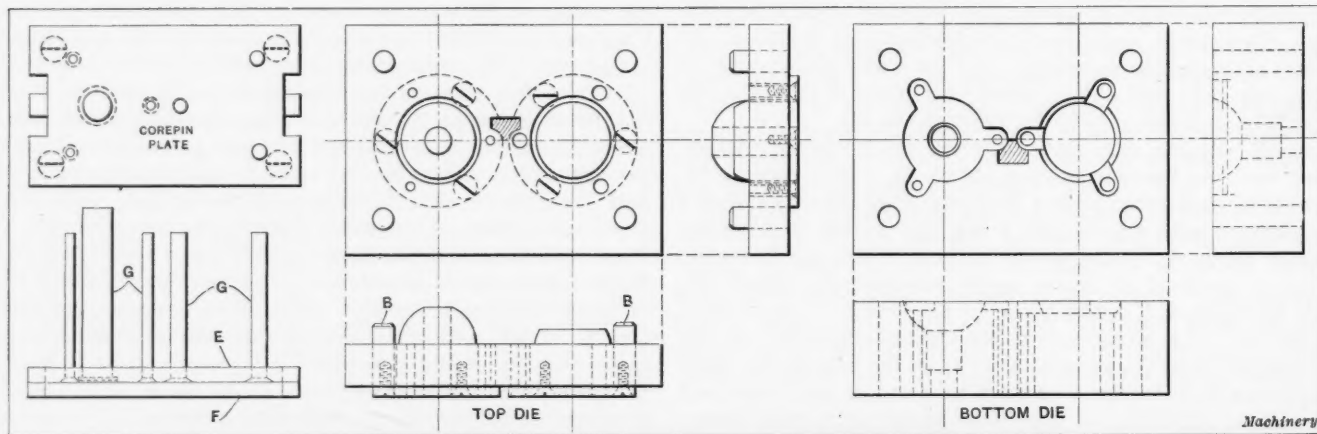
Core-pin Plate, Top Die and Bottom Die for Die-casting Mold
